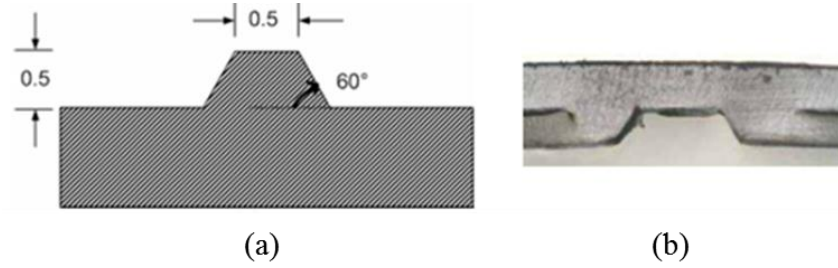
(a) Aluminum molding tool cross-section. (b) The polymer view after UE [28].
